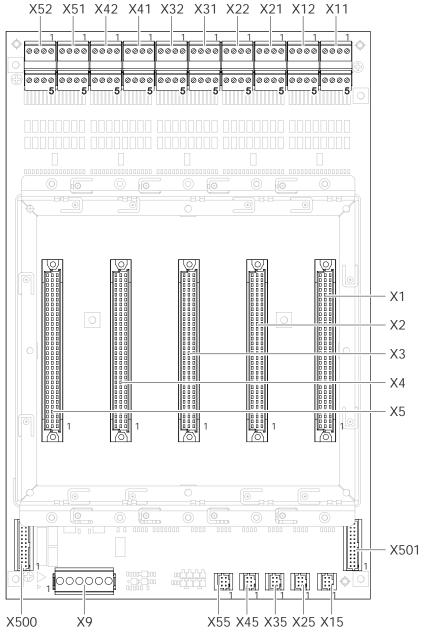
PCB view of card cage (5 slots) FCA2008-A1
